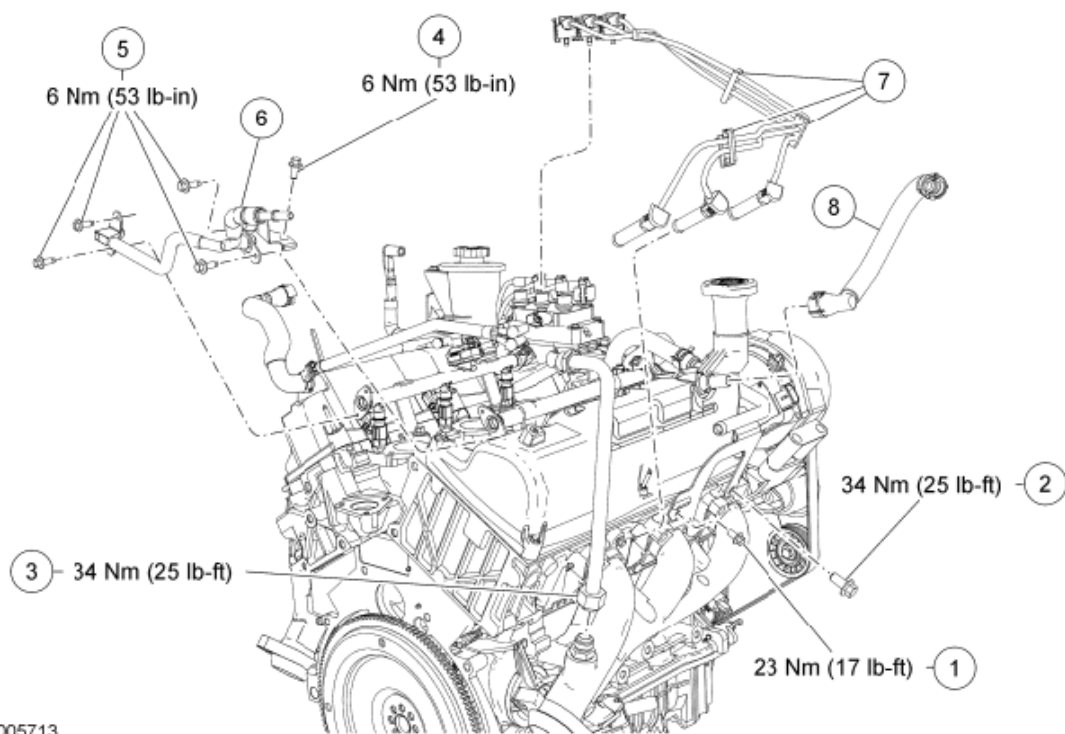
Identifying RH Valve Cover Components With Torque Specifications (1 Of 2)
